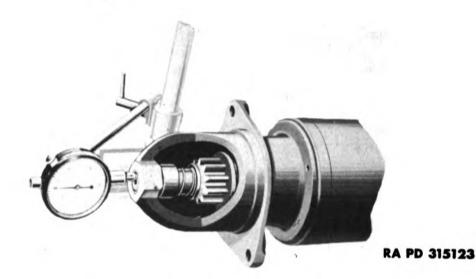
Measuring Armature End Play with Indicator (41-I-100)
